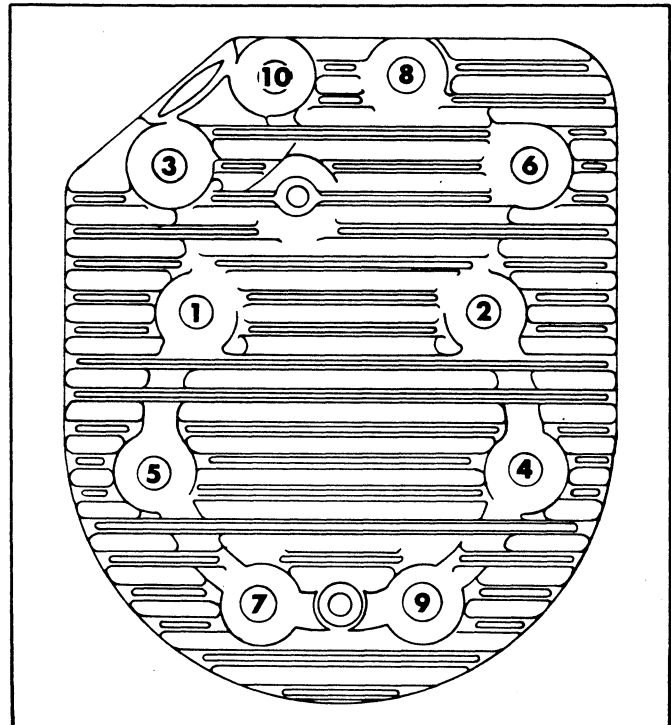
CYLINDER HEAD TORQUING SEQUENCE
